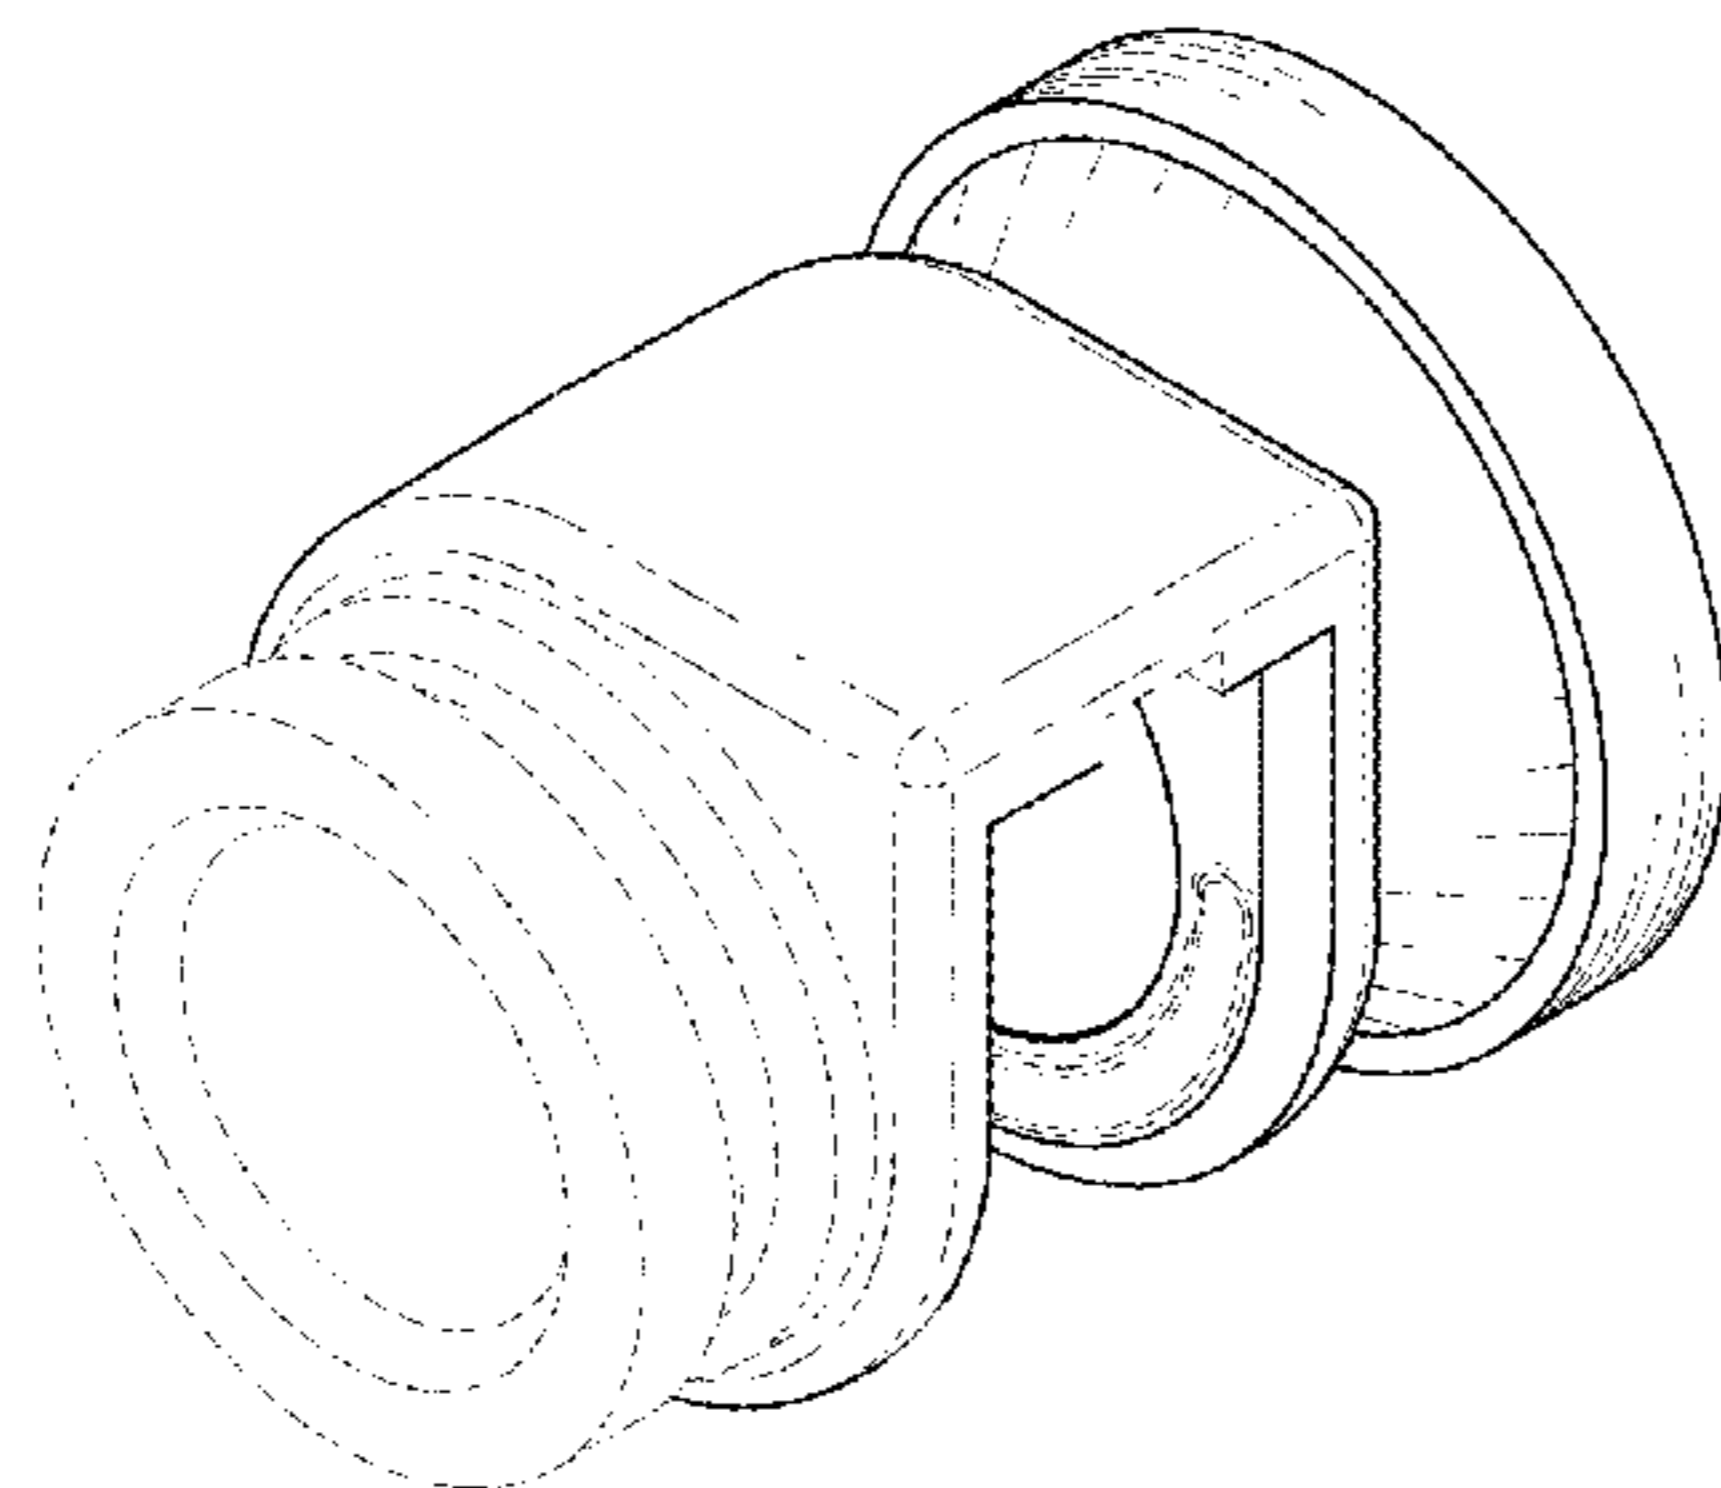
is a rear, bottom, and right side perspective view thereof;
